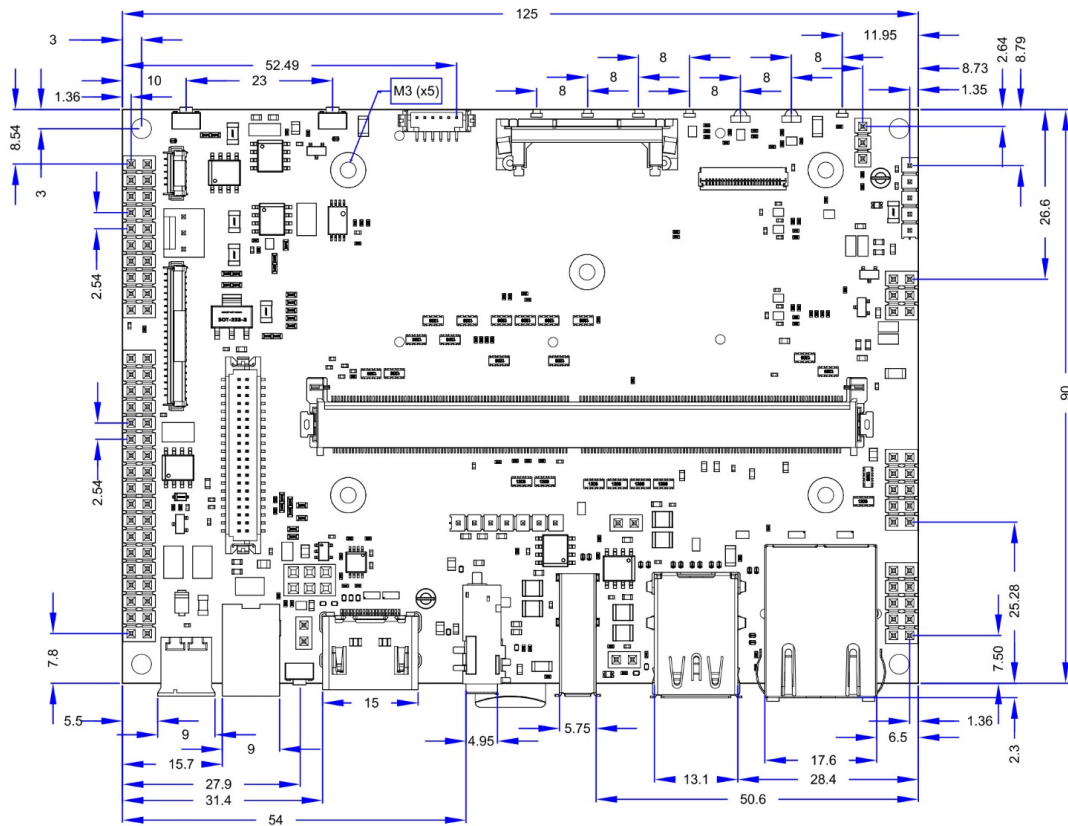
Ixora Carrier Board dimensions (in millimeters) – top side (top view)
